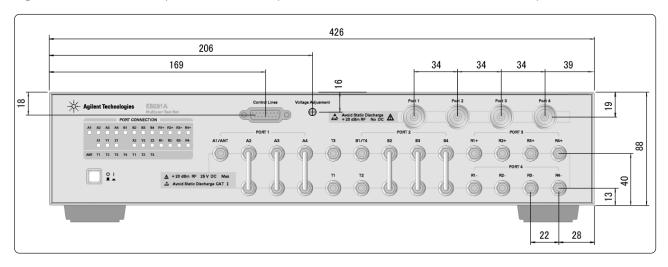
Dimensions (rear view, in millimeters, nominal)
